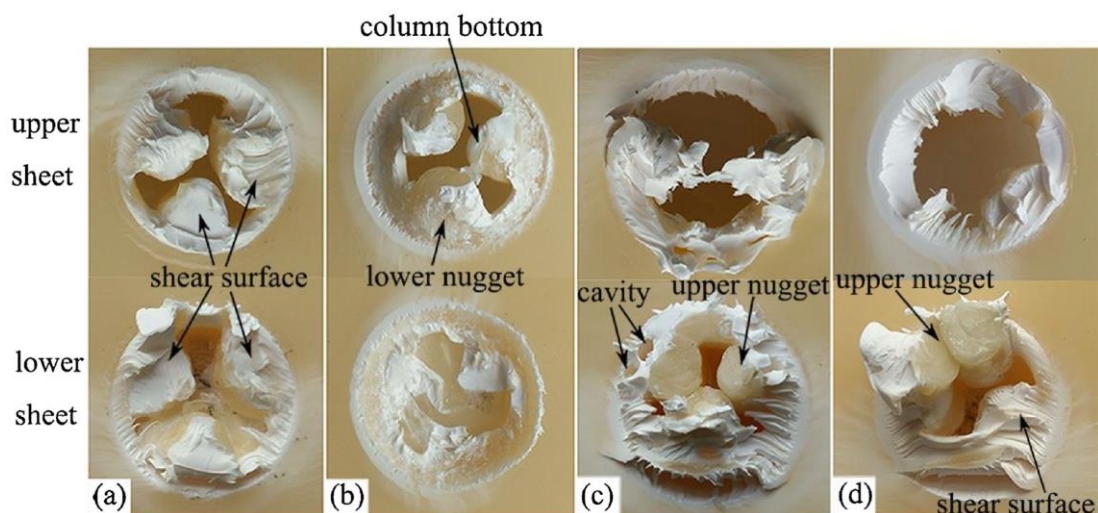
Fracture types: (a) shear, (b) pull lower, (c) upper nugget, (d) pull nugget with mixed shear fracture [63].
